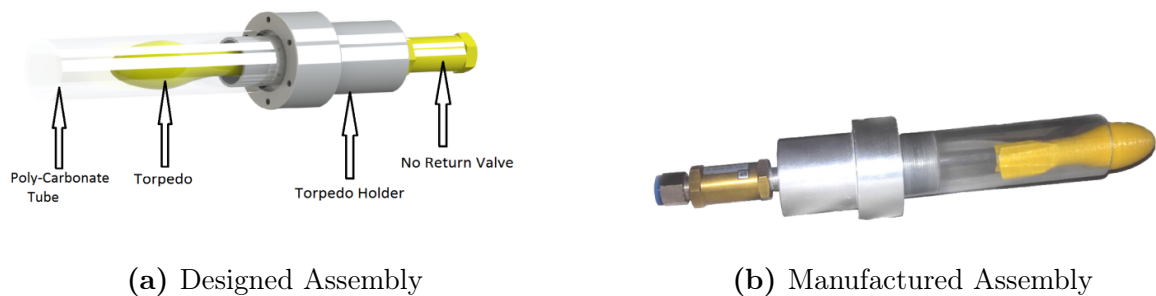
Torpedo Shooter Assembly for a single Torpedo
